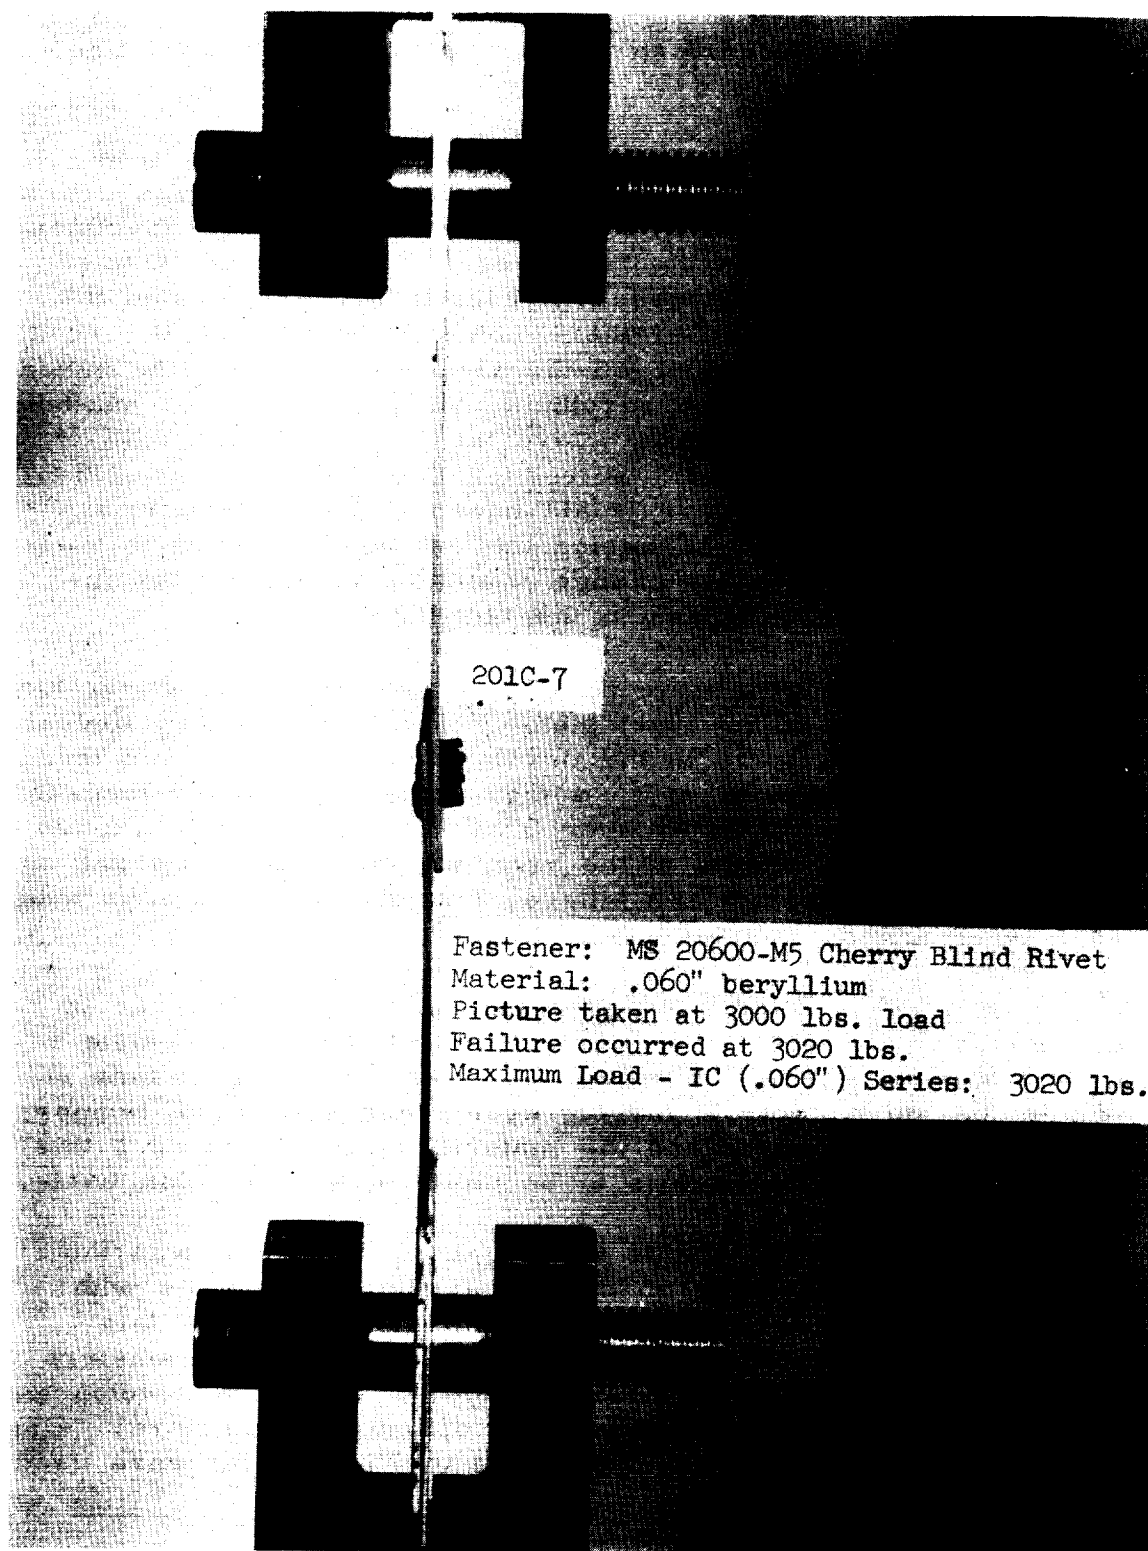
TYPE IC SPECIMEN - 0.060-INCH MATERIAL - TENSILE TEST
